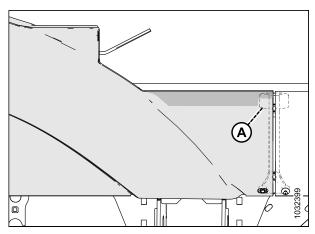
Right Outboard Linkage Cover – View from Rear of Header
